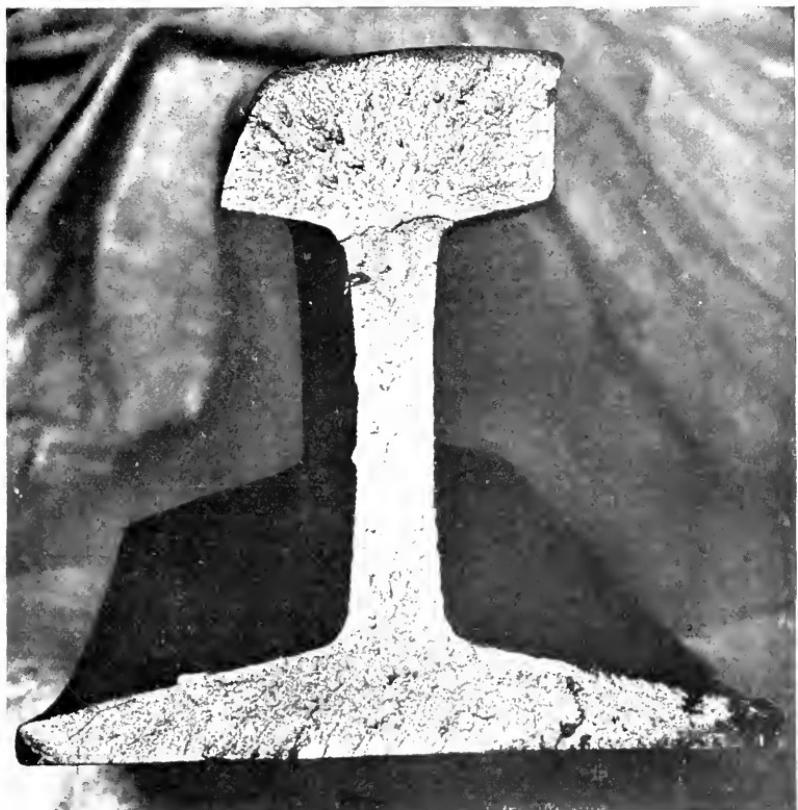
End View of Rail Fractured in the Testing Machine. Rupture began at an indentation on upper edge of base, right-hand side.
